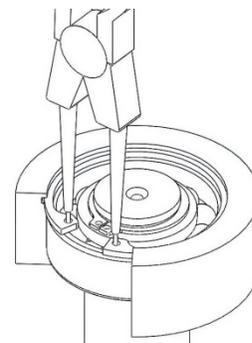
The 3D drawing of the mounting of a retaining ring into the bore groove to keep the bearing in place.
